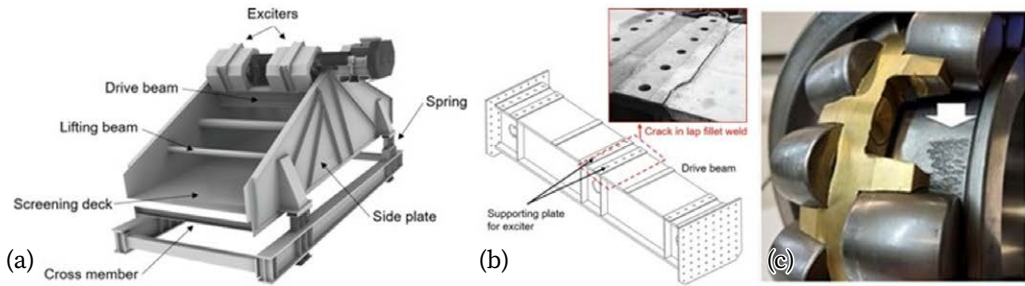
(a) Vibrating screen; (b) fractured drive beam [42];
